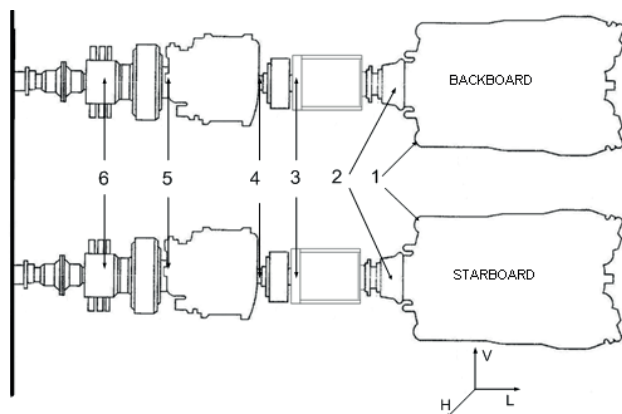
Arrangement of measurement points on the analyzed propulsion systems: 1 – engine bed plate; 2 – power consumer facing engine shaft end; 3 – hydrokinetic coupling; 4 – bearing at input to reversing reduction gear; 5 – bearing at output from the gear; 6 – thrust bearing
